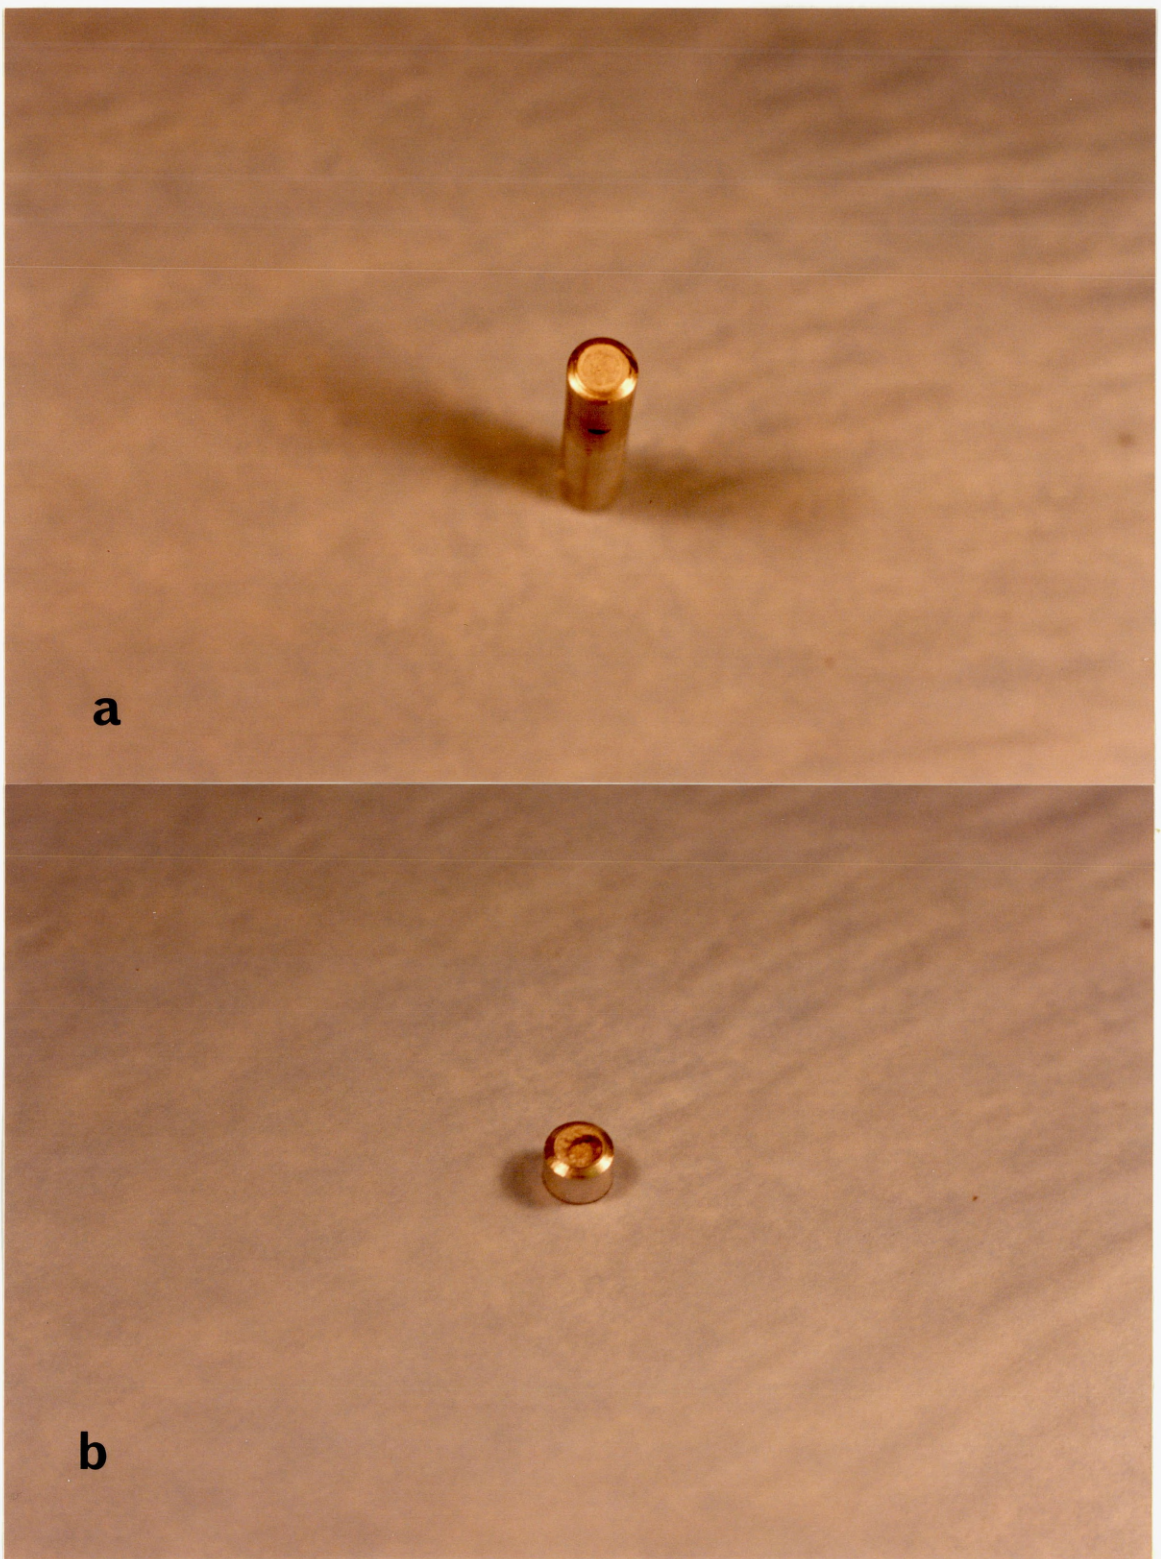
Fracture surfaces of rotating bending specimens;
